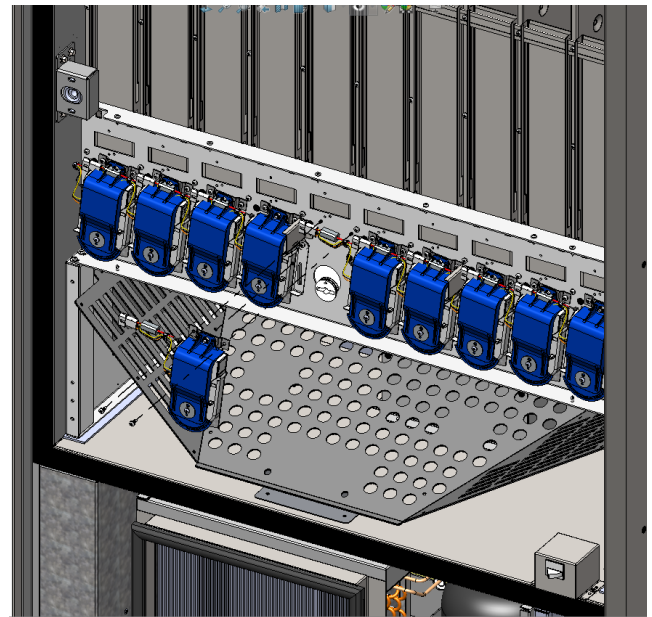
Motor Installation/Removal Shown without Motor Cover
